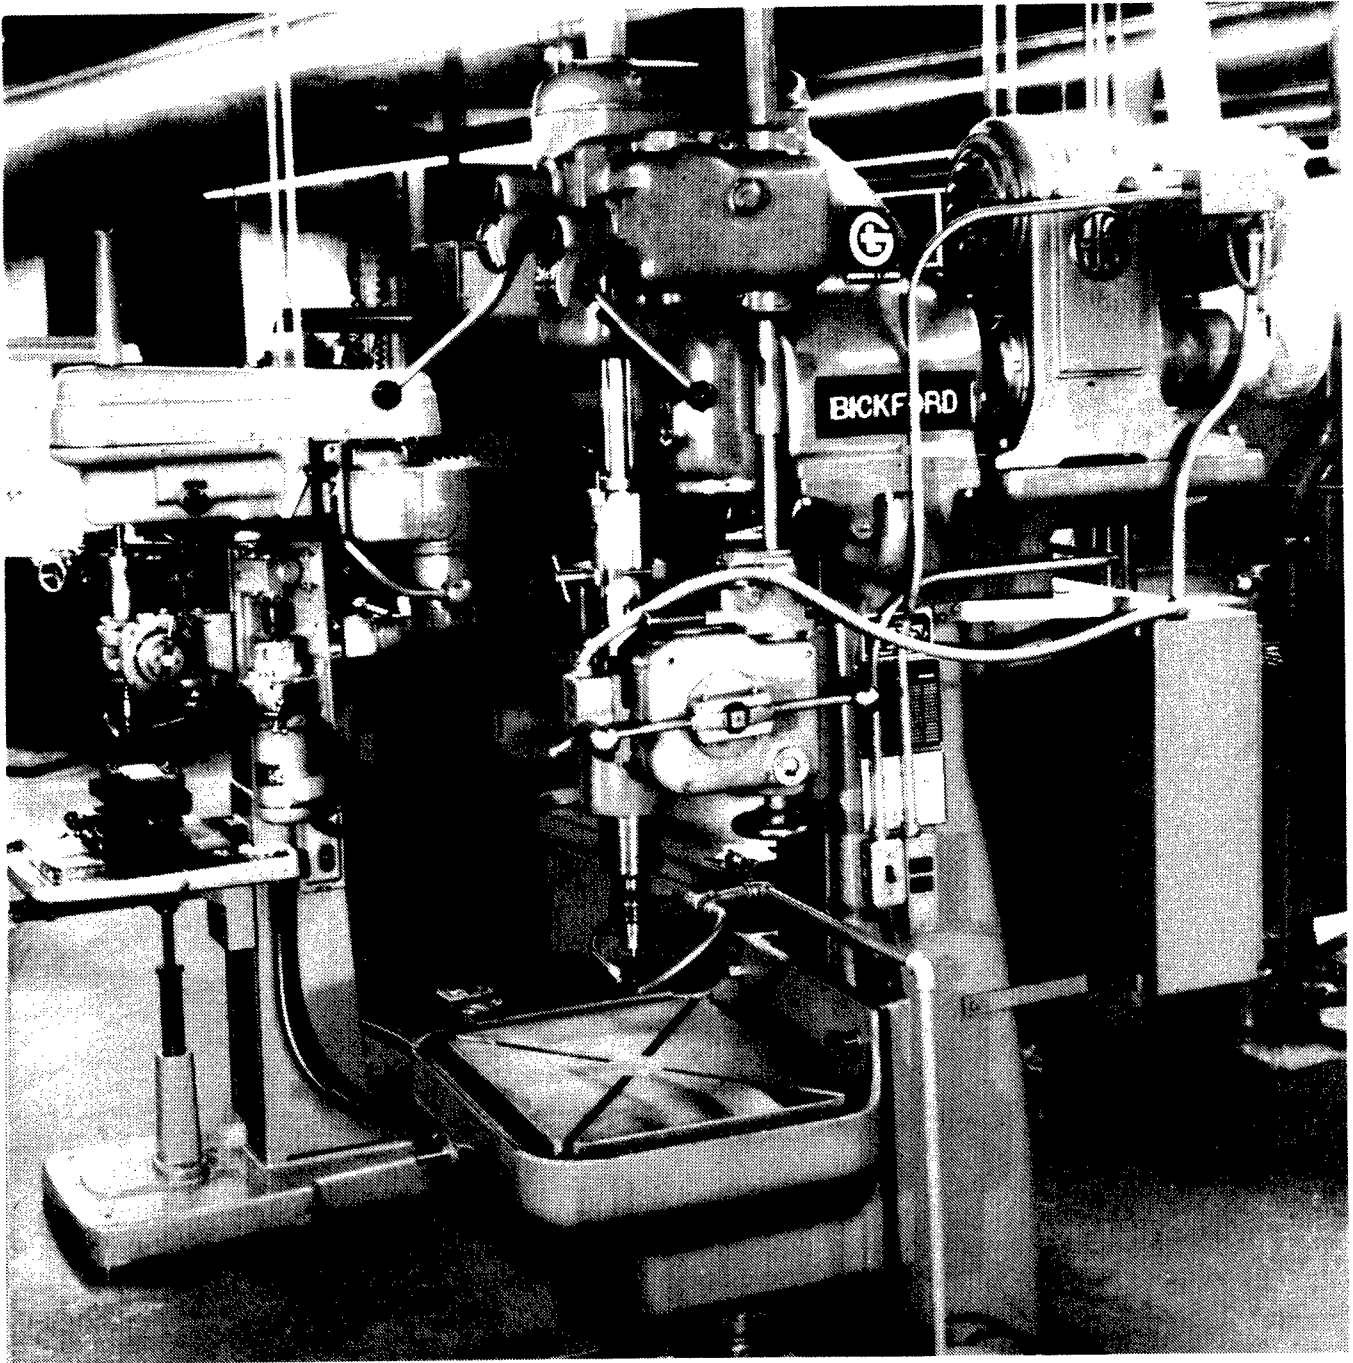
Gidding & Lewis Bickford Milling Machine
